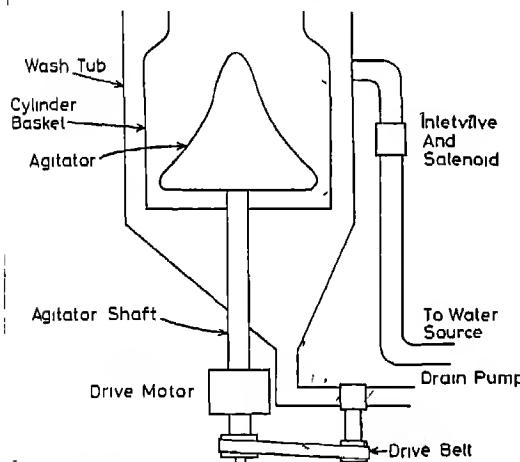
Pictorial View of Agitator Type Washing Machine.
